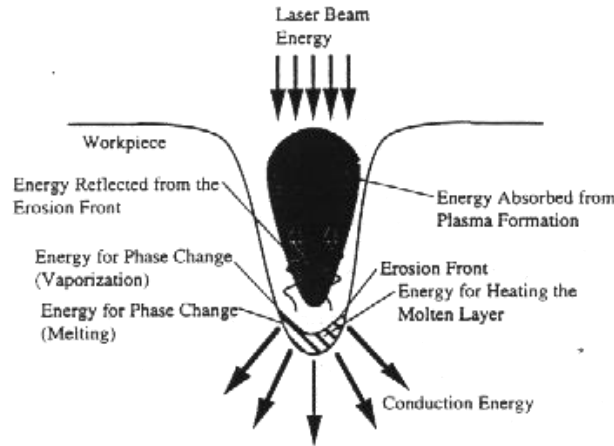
A complete Gaussian laser beam making hole in the work piece.
